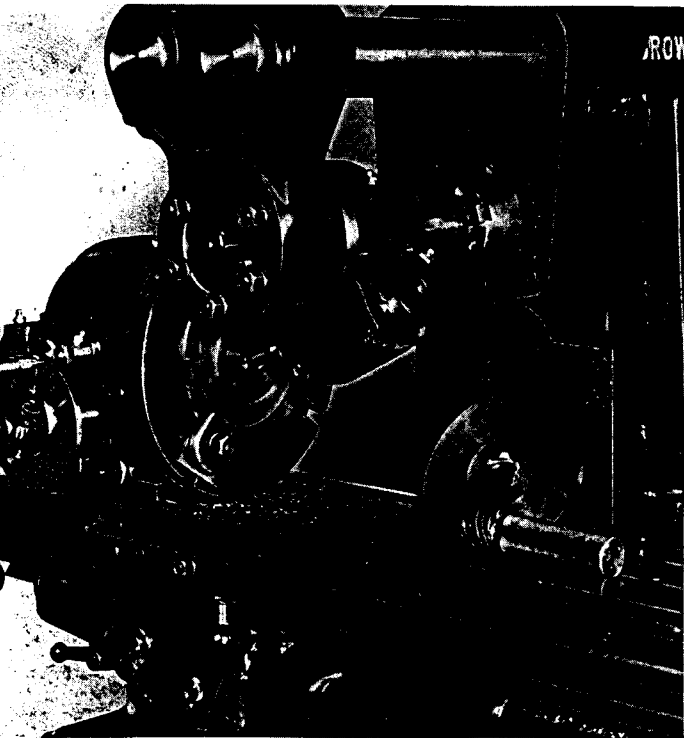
Milling an internal thread, using a No. 0 High Speed Vertical Milling Attachment which is reversed on the overarms to bring the spindle to the desired position. With the table of the Universal machine set at zero, the Attachment spindle is set at the angle of spiral and the cut is taken at the front of the hole. The work is held on a special face plate mounted on the threaded nose of the headstock spindle.
